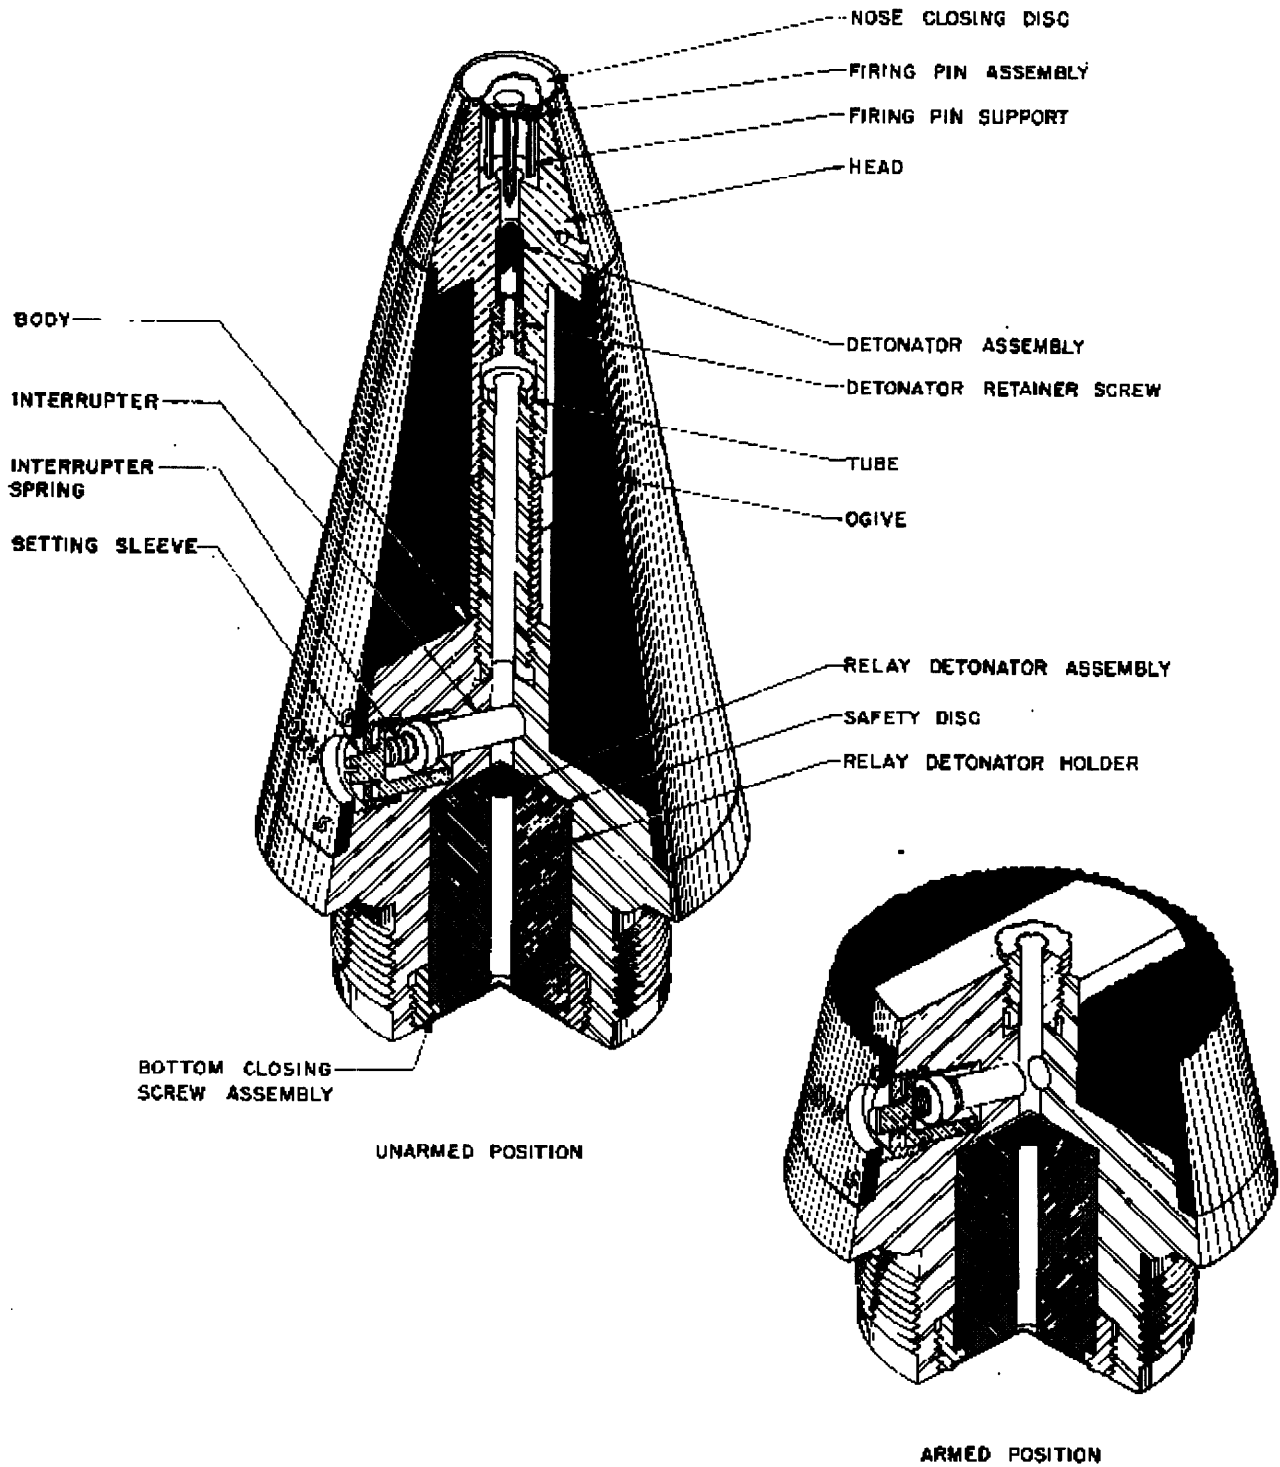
Sectional View of Fuze Mk 30 Mod 3 Showing Unarmed and Armed Positions.
